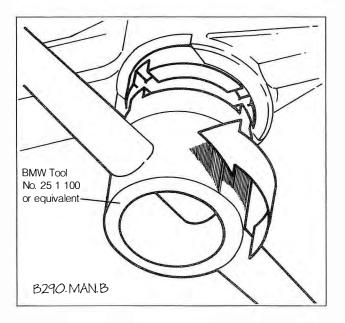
Removing shift lever retaining ring on models with aluminum shift console.
